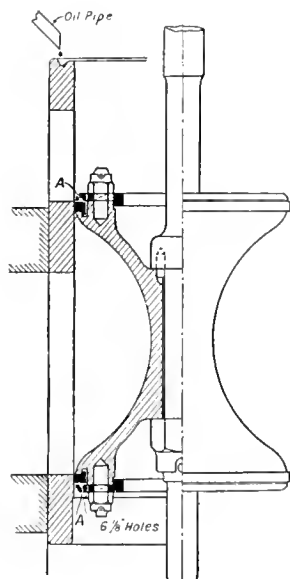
PISTON-TYPE DROP VALVE FOR STEAM ENGINES
